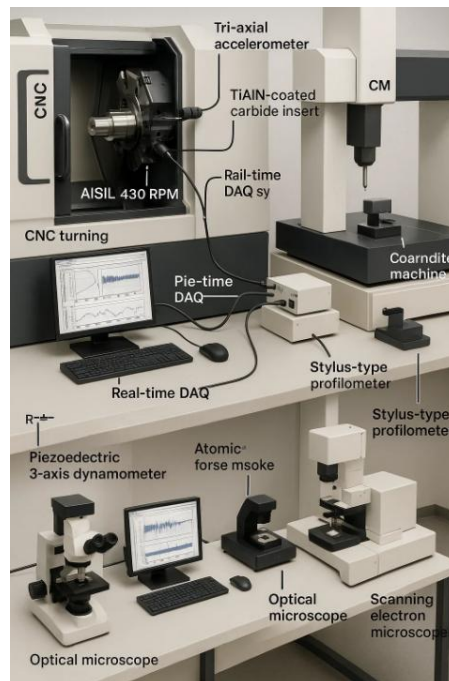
Integrated CNC Machining Test Rig for Evaluating the Influence of Cutting Depth on Surface Finish, Dimensional Accuracy, and Dynamic Stability
